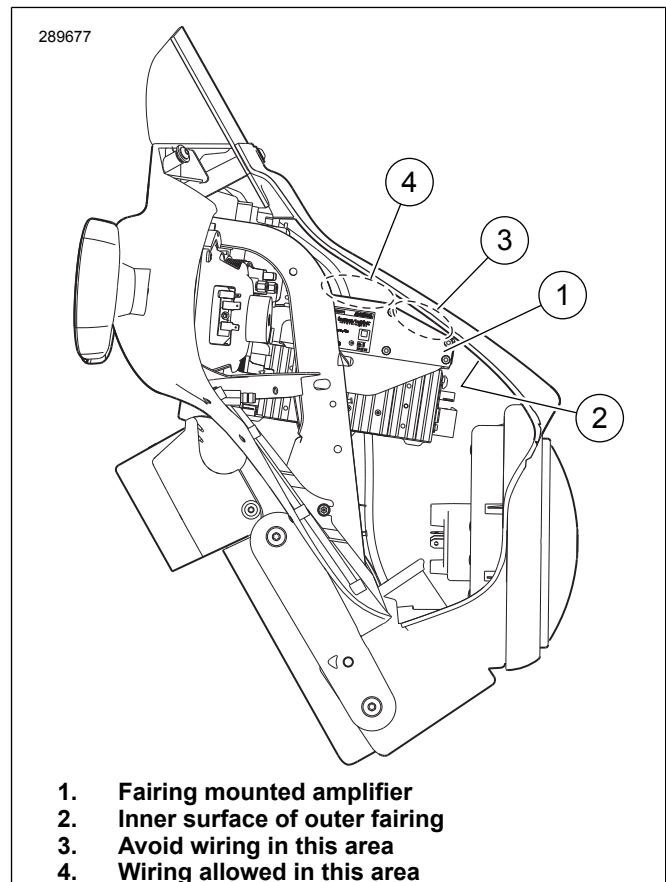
Fairing Mounted Amplifier Wiring Clearances
